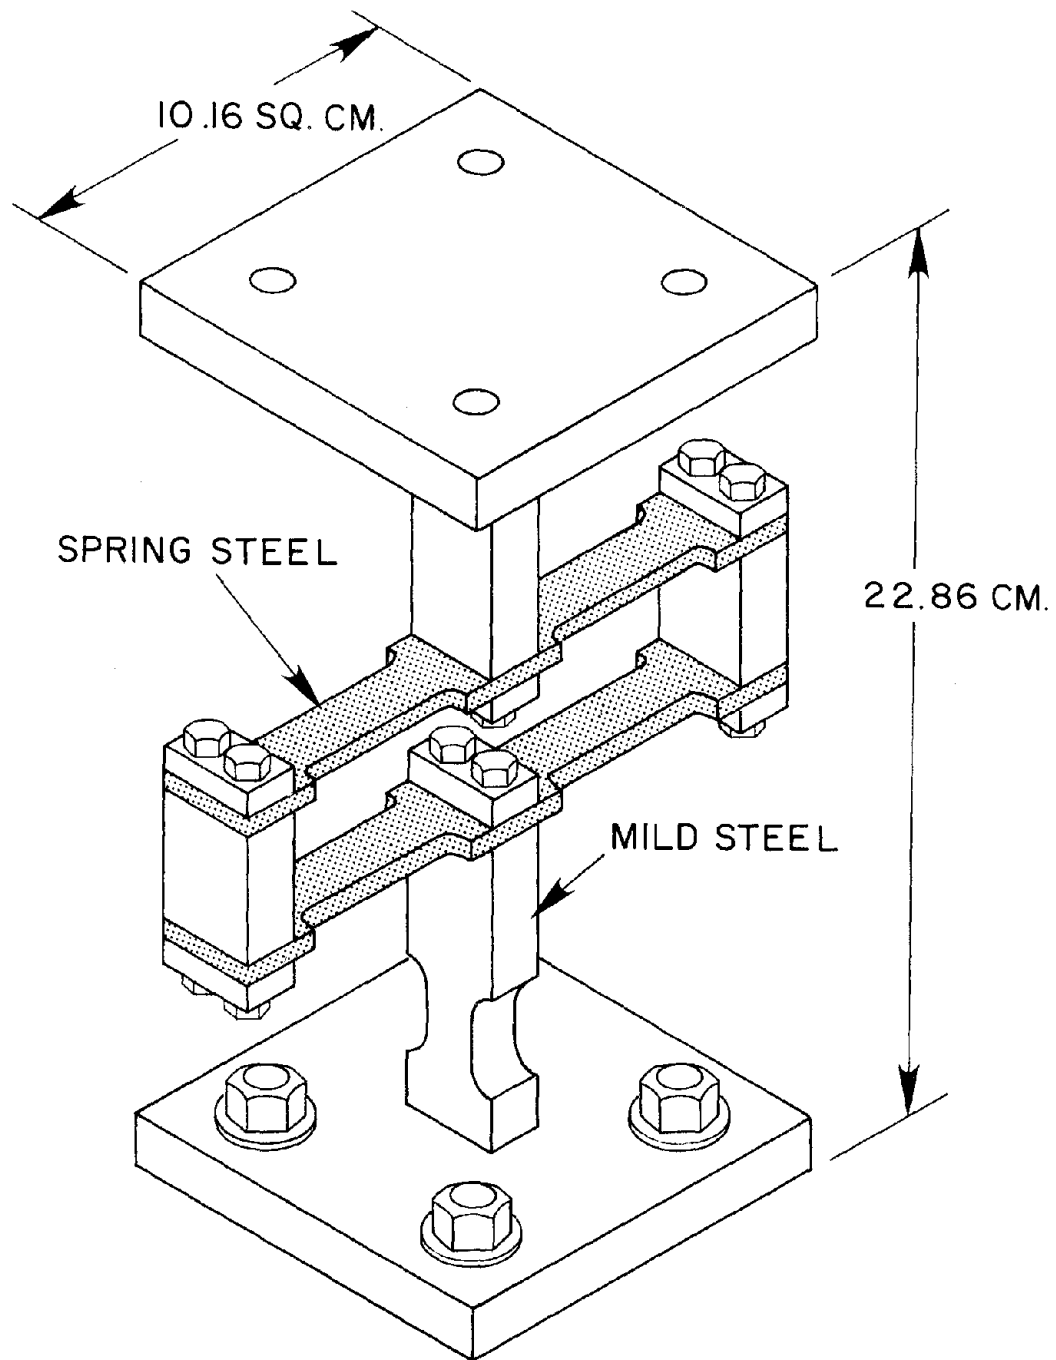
A TYPICAL FOUNDATION SPRING
